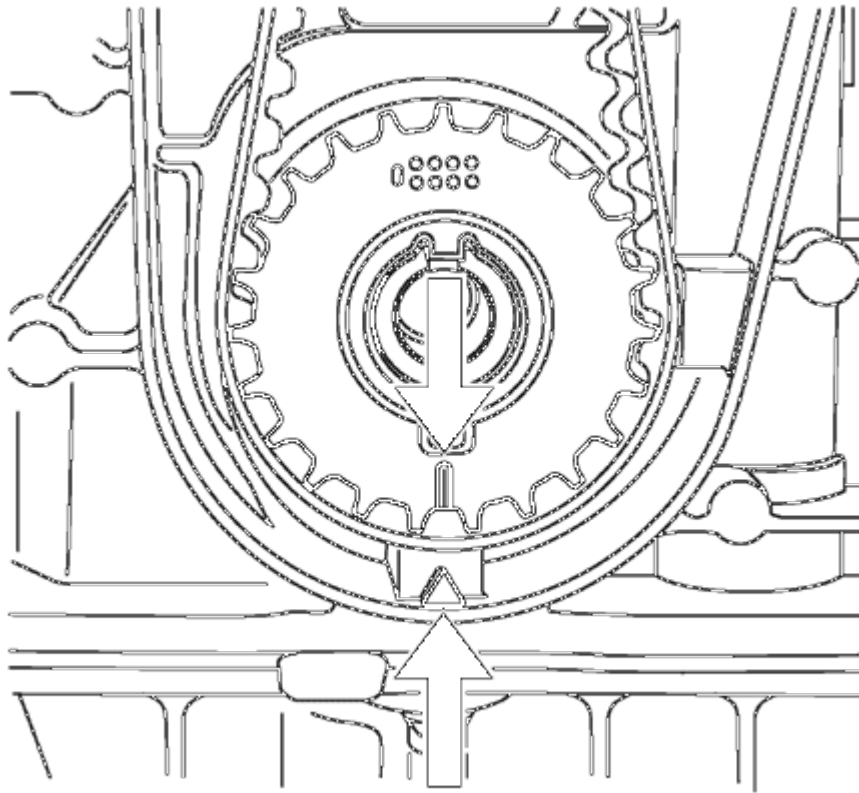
Aligning Timing Belt Drive Gear And Oil Pump Housing
